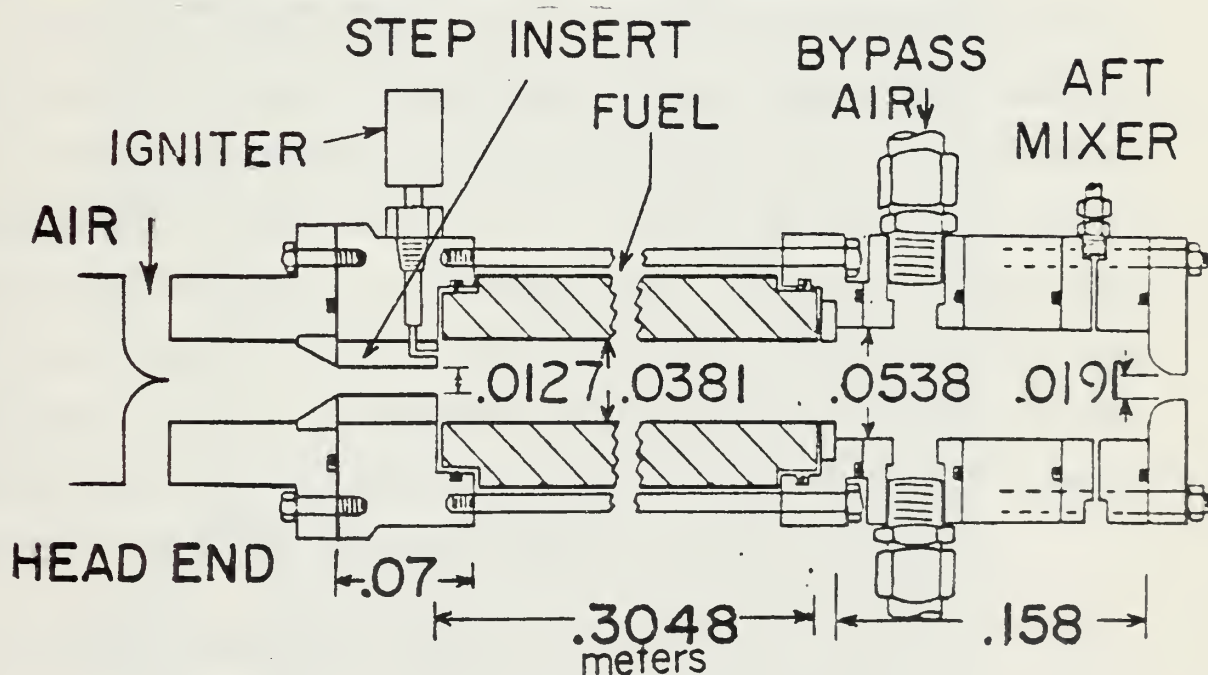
Schematic of Solid Fuel Ramjet Assembly
